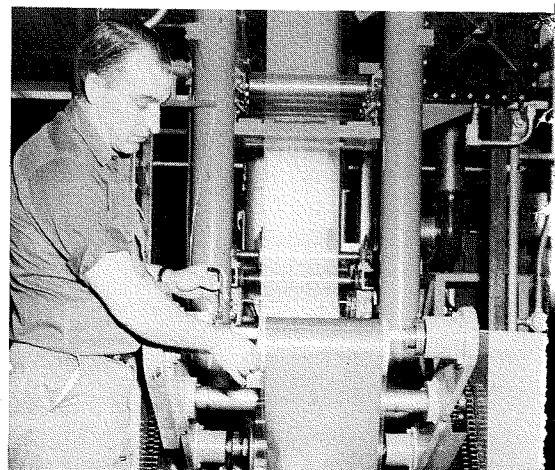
J. Moore adjust roller mechanism on coating machine.
